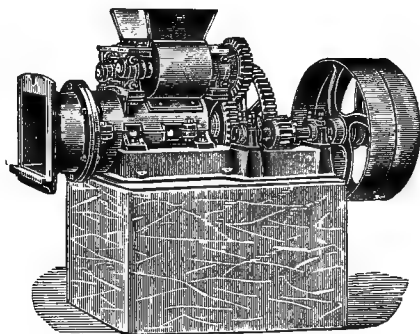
Brick machine, by Borner & Co., Switzerland.
